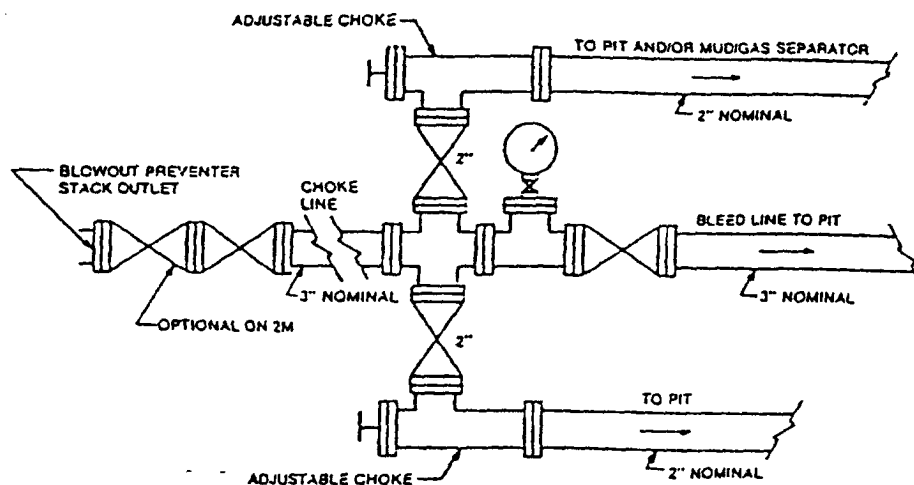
Typical choke manifold assembly for 2M and 3M rated working pressure service — surface installation.
